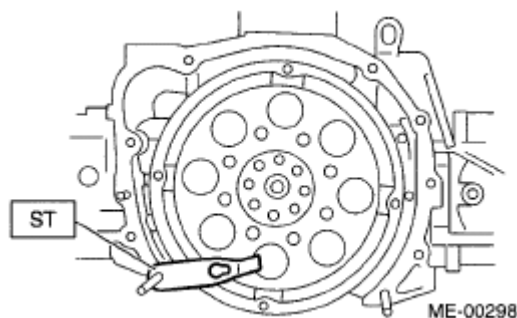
Locking Crankshaft Using Crankshaft Stopper 498497100
